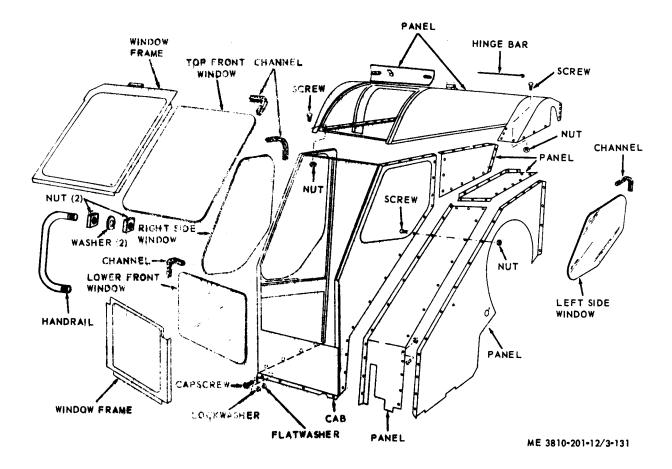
Handrail, panel, window frame, and cab, removal and installation.
